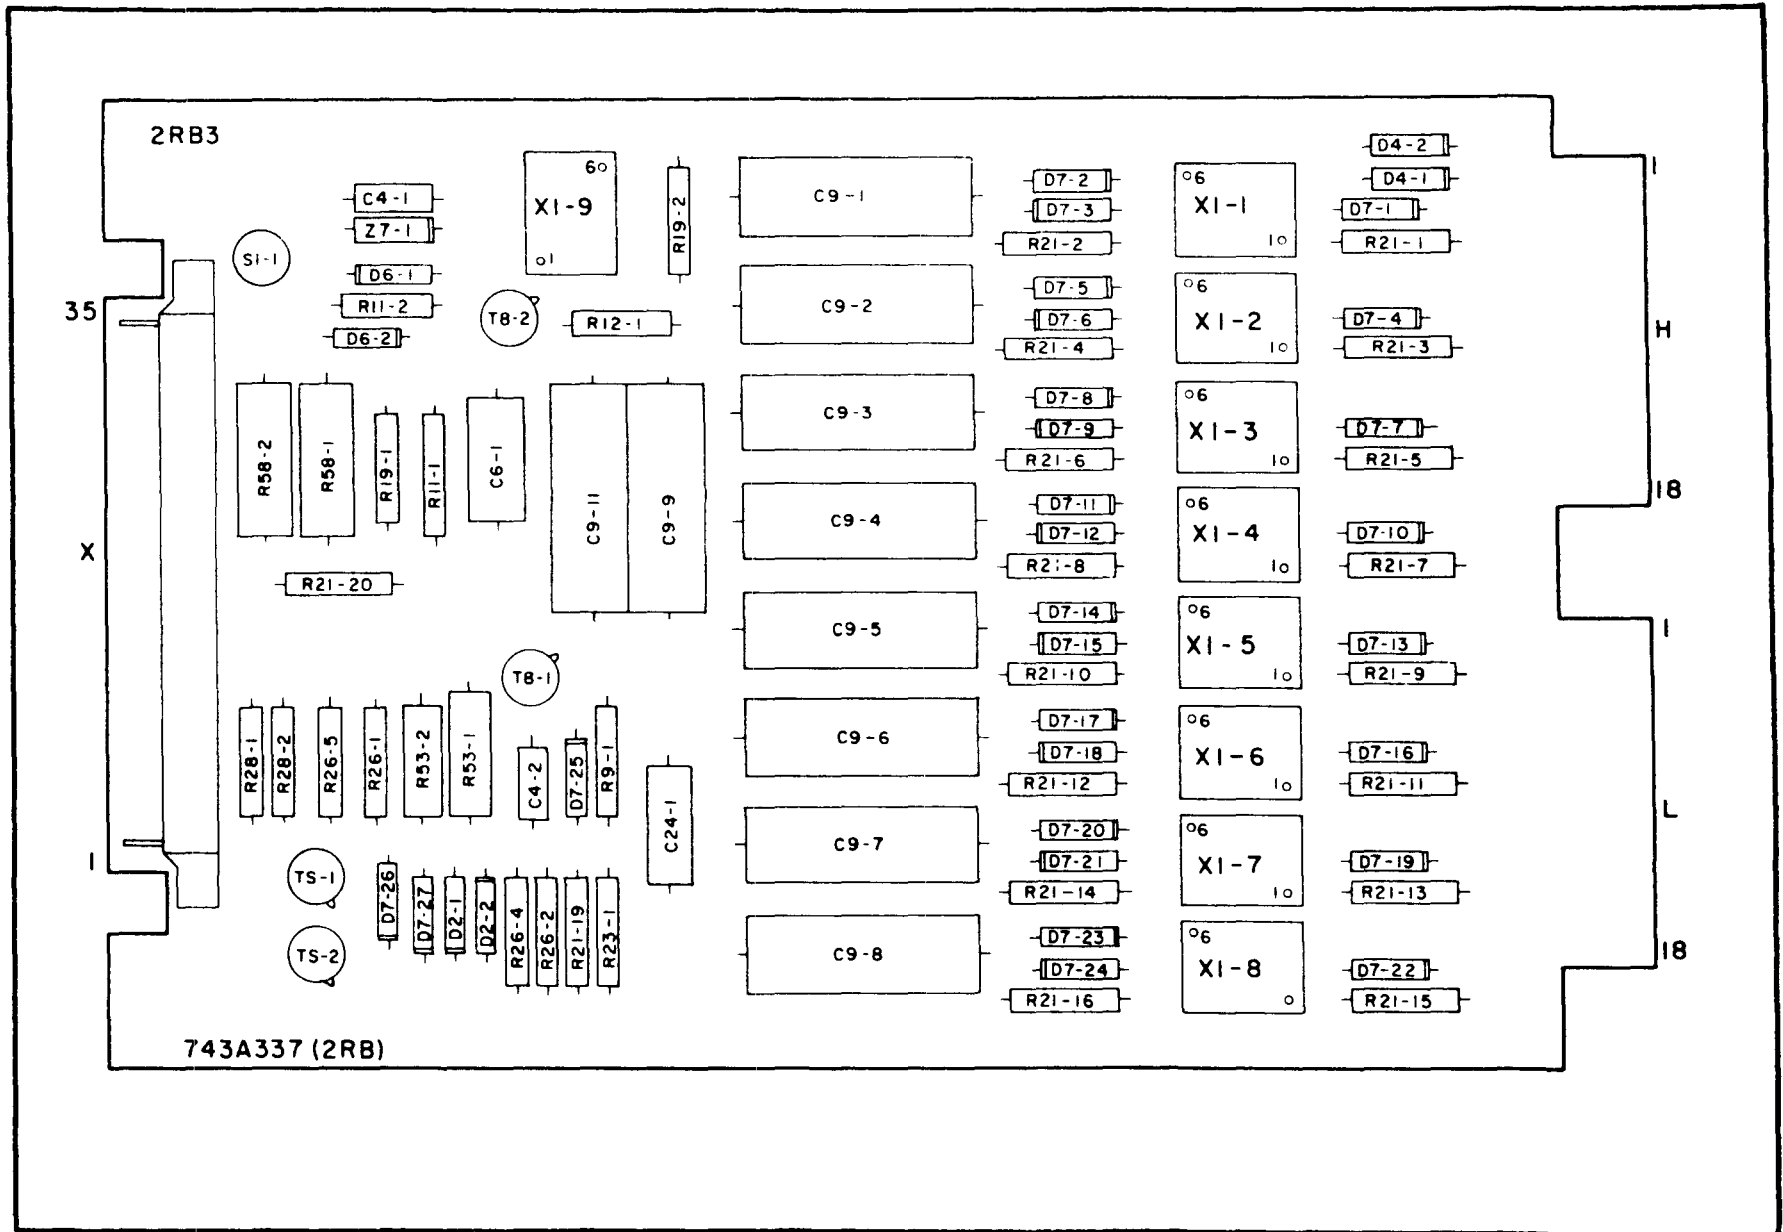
2RB3 ASSEMBLY (REF. DWG. 743A337, SUB 11)
